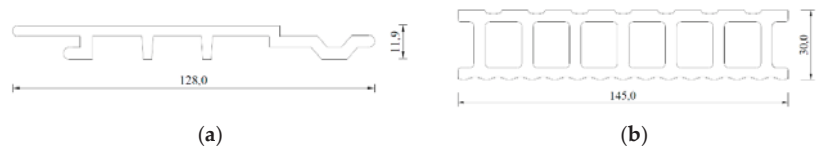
Sample NFPC building profiles for (a) facades, (b) floors. The dimensions are given in mm.
